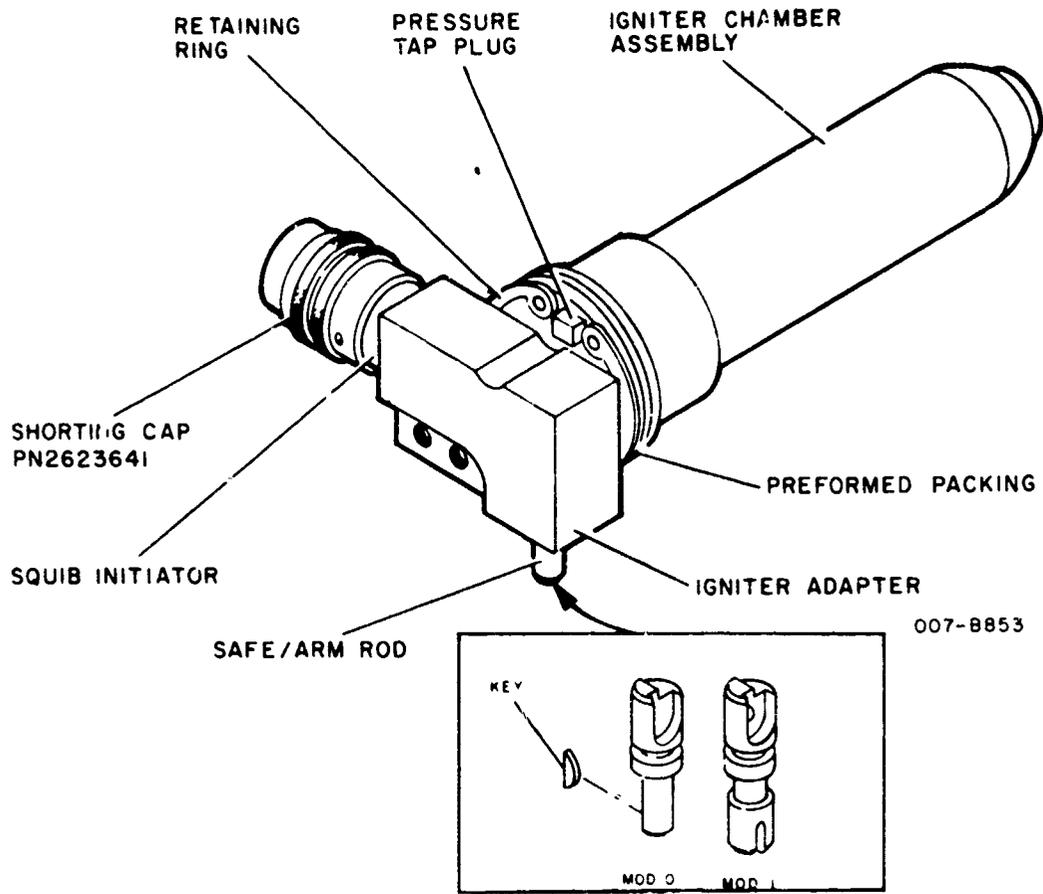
Safe/Arm Igniter Assembly Mk 274 Mod 0
